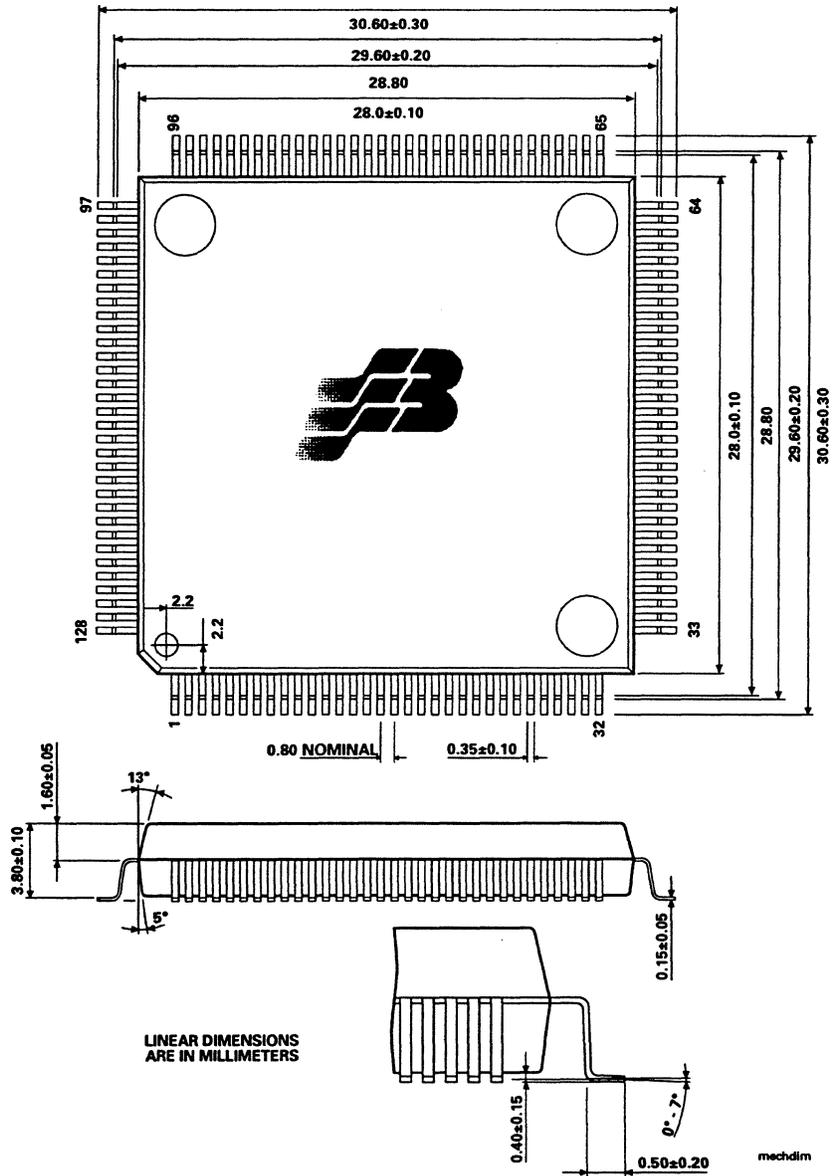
128-pin PQFP Mechanical Dimensions
